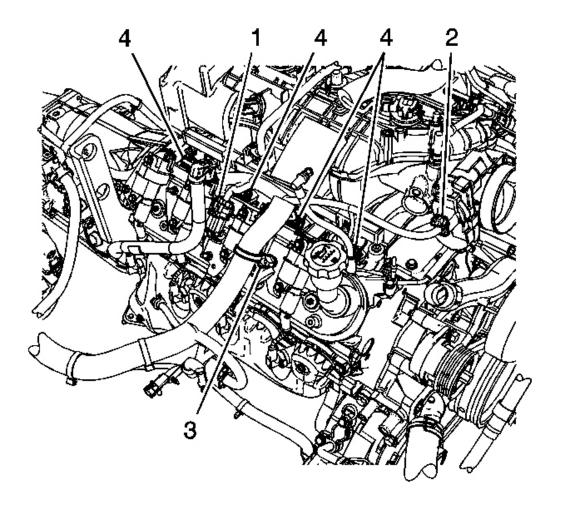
Engine Harness Electrical Connector & Ignition Coil Harness Electrical Connector
